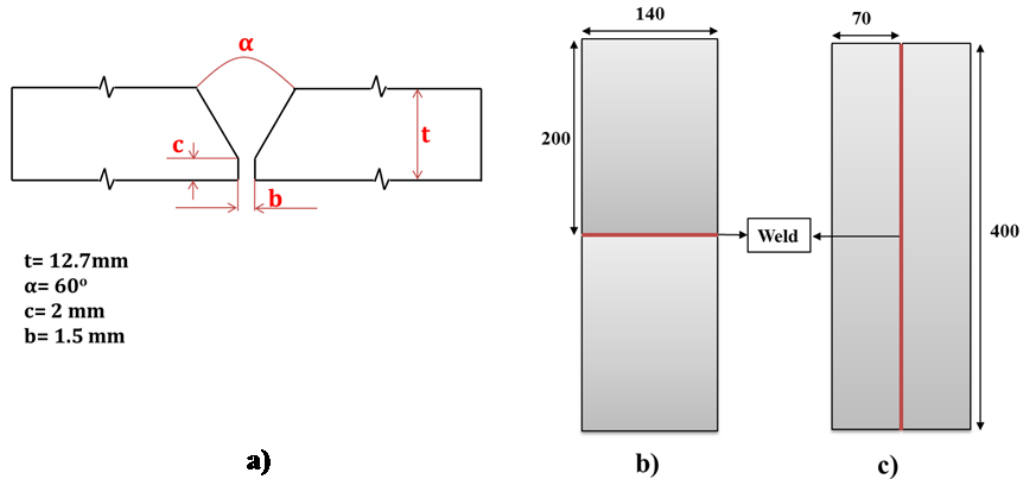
Illustration of joint and orientation details on butt-welded plates: a) Joint configuration, b) butt-welded plate with the short weld along 140mm edge, and c) butt-welded plate with the long weld along 400mm edge.
